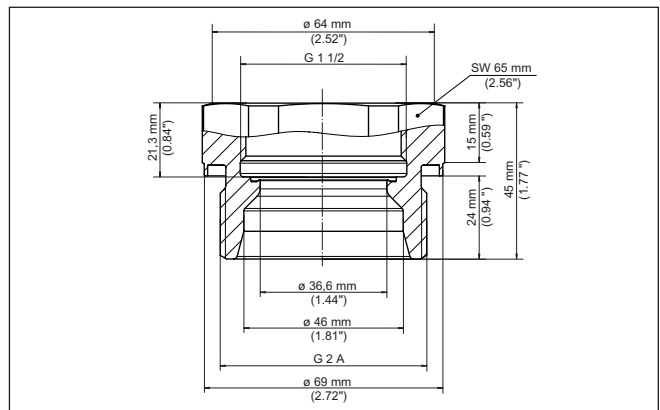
Dimensions of threaded adapter G1½ (DIN 3852-X) on thread G2 (DIN 3852-X)
